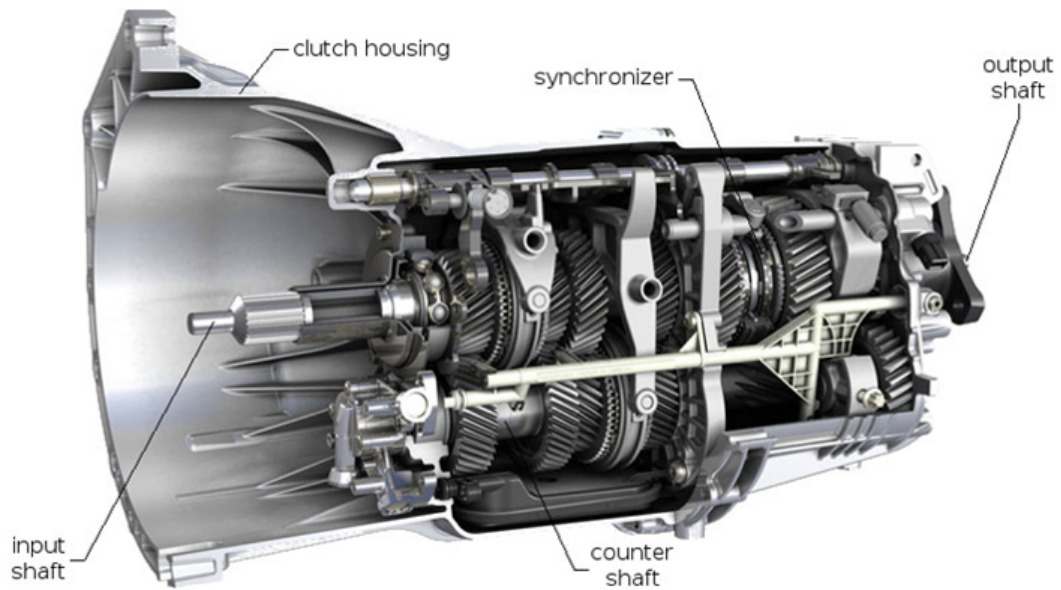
A section view of an MT gearbox for a passenger car [1].
